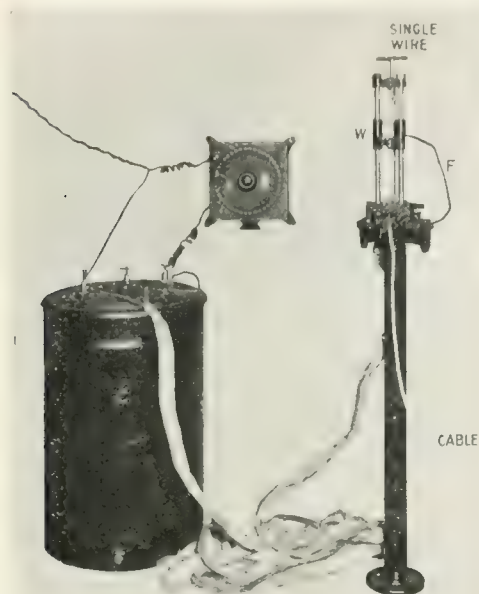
PERCUSSIVE WELDING OUTFIT
